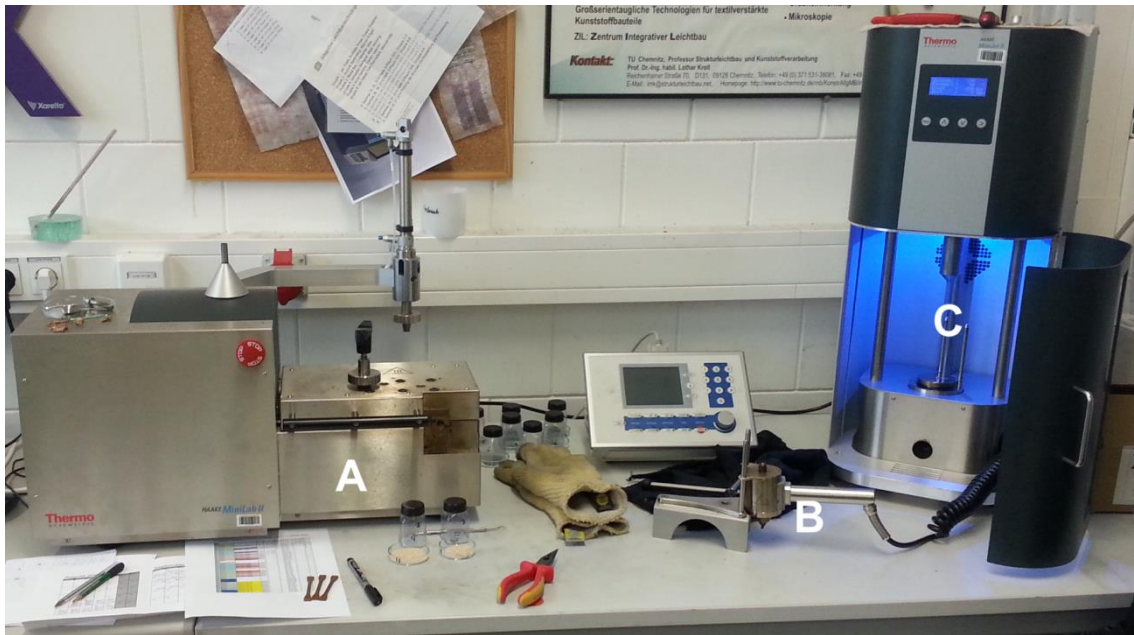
Experimental bench at SLK-TUC, showing the HAAKE MINI-LAB (A), the hot cylinder of the HAAKE MINI-JET II (B) and the injection molding machine’s main body, with the piston at the top and mold on the bottom (C).
